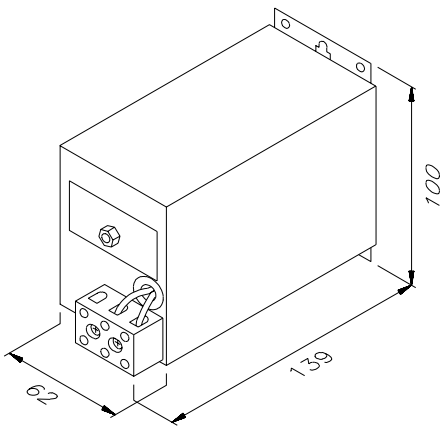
Outline drawing and mounting OPTION 200BR004
